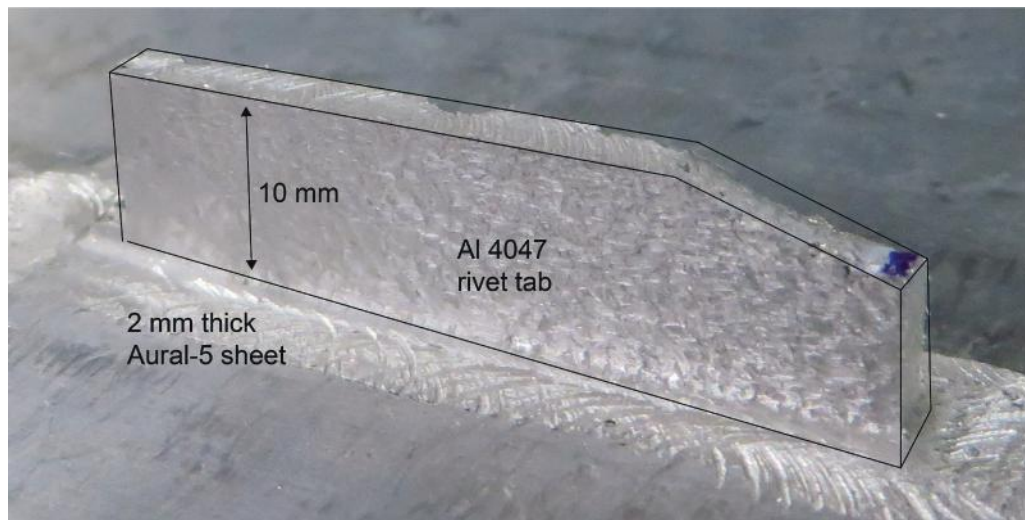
Annotated photograph of the laser hot-wire deposited and machined 4047 rivet tab on HPDC Aural-5 plate. Source: ORNL.
